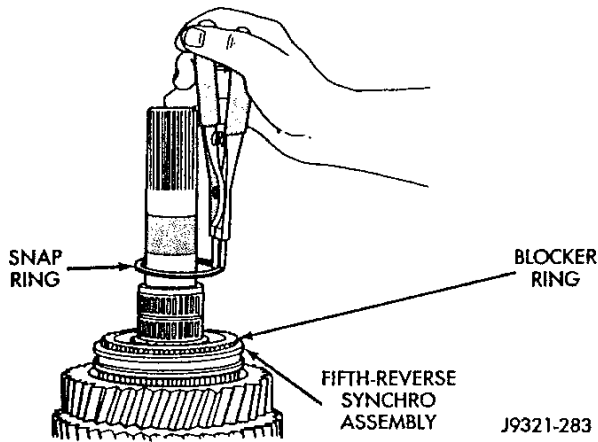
Removing Fifth-Reverse Snap Ring And Blocker Ring
